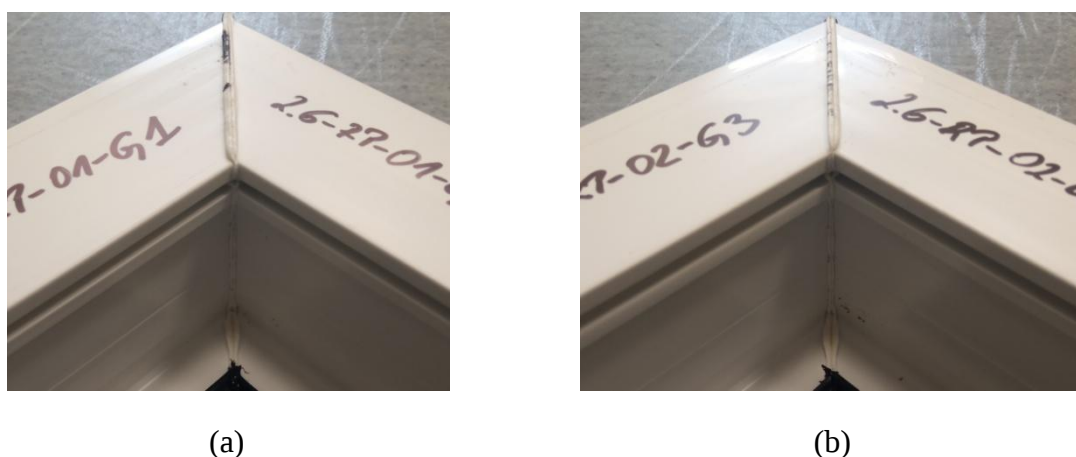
Selected welds from test specimens produced with composite milling to a depth of 0.5 mm: (a) welded using head 1, (b) welded using head 3 [13]
